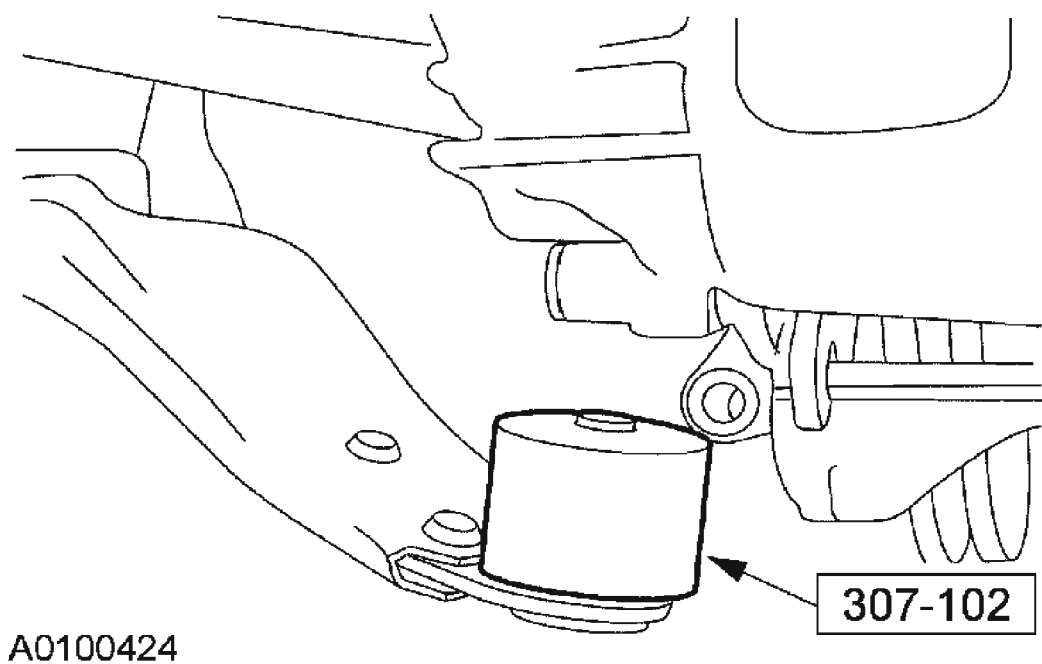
Removing Nut, Bolt And Detaching Ball Joint
